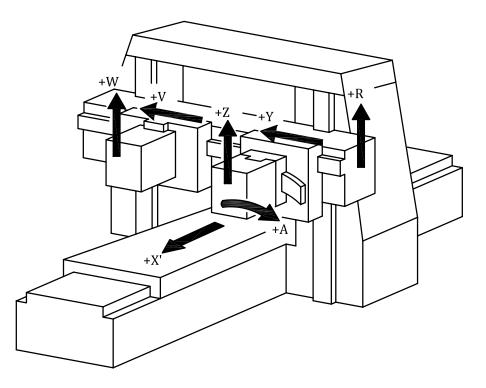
Example of a double column bed-type milling machine (portal milling machine)
